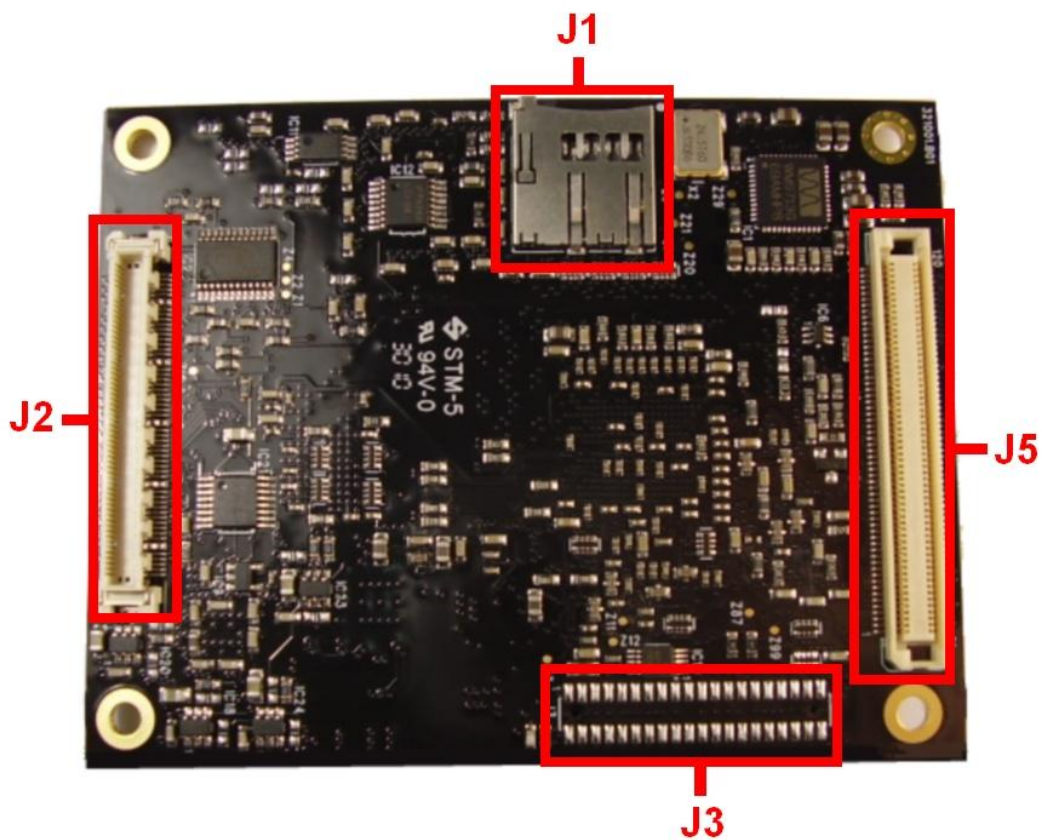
BLACK365 CONNECTOR POSITIONS – BOTTOM SIDE
